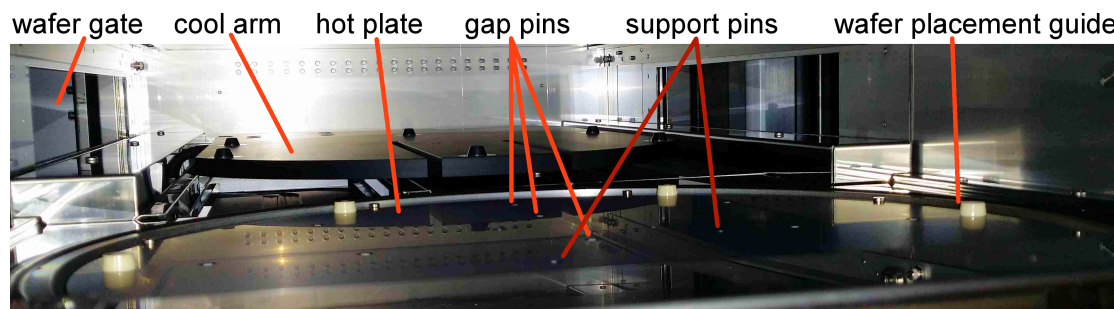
hot plate inside the cluster machine (the exhaust ventilation was removed for this photo)
